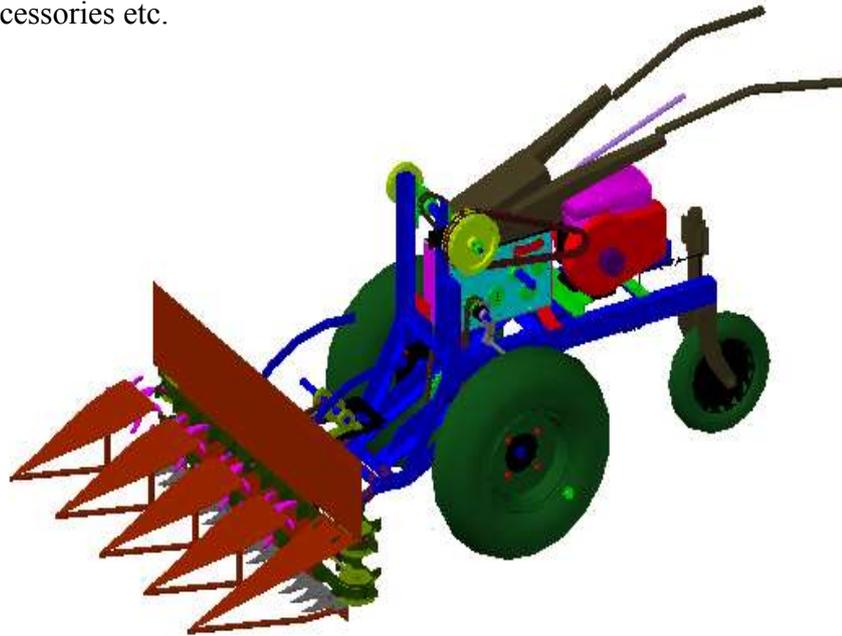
AutoCAD drawing of power transmission unit of BRRRI developed reaper
